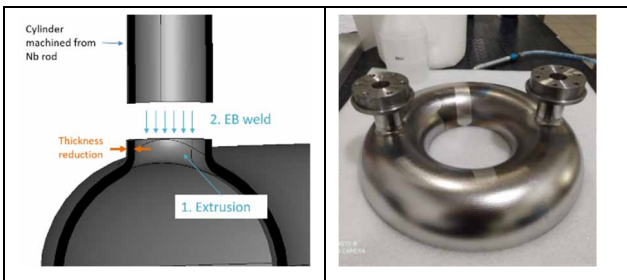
HPR tube and welding principle (left). Half torus with HPR ports (right).
